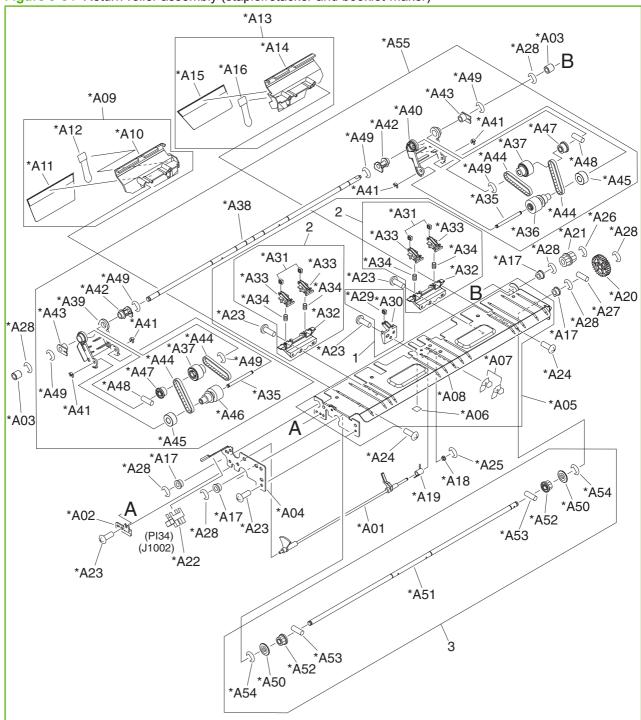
Return-roller assembly (stapler/stacker and booklet-maker)
